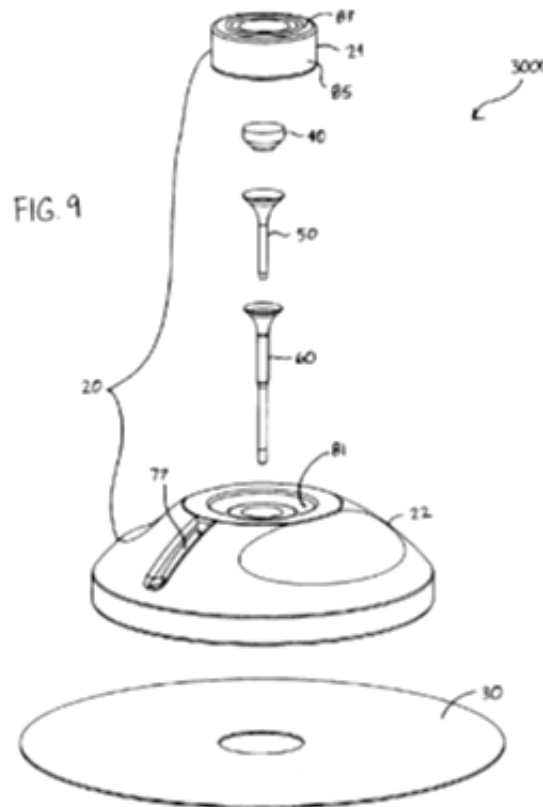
of Turner is a perspective, exploded view of its fluid delivery system including body 20 and rotation-restricting recesses 77
